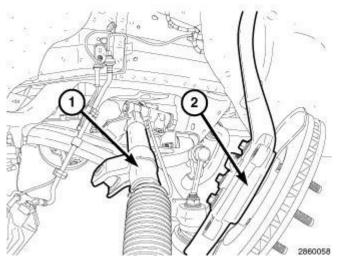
Steering Gear & Knuckle/Rotor Assembly Courtesy of CHRYSLER GROUP, LLC
